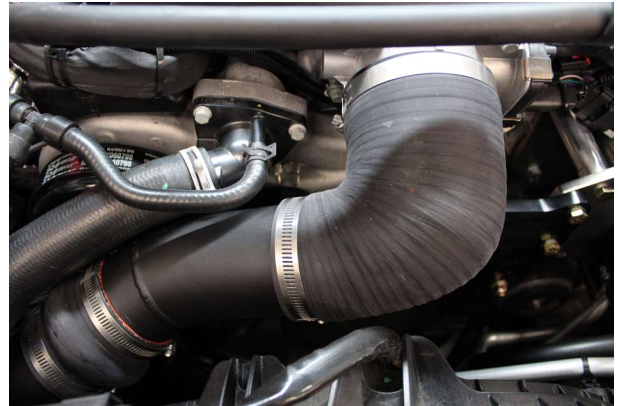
j: Remove Throttle Body Sleeve & Tube D
